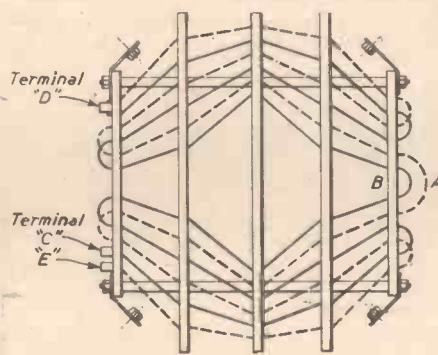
(Left) Threading the element through the former. File away to thickness of 18 gauge plate
